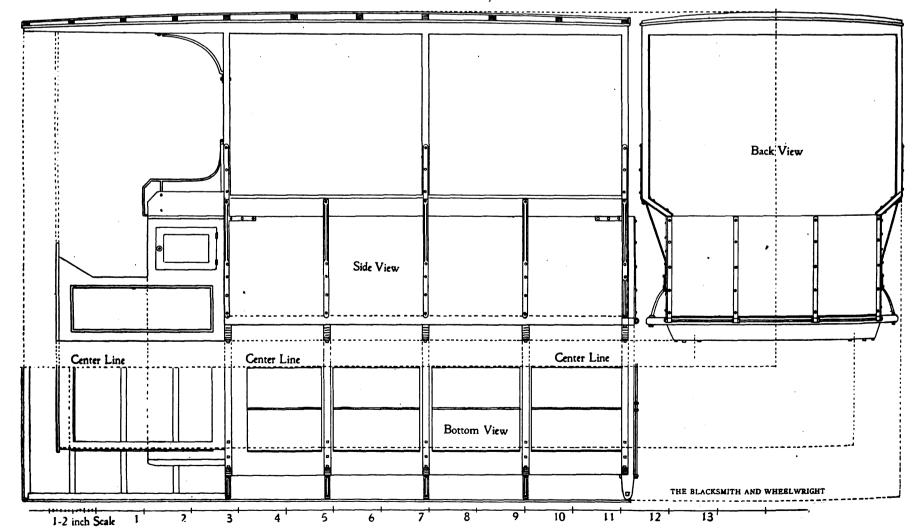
This has wing boards, being narrowed across the sills and wide above the wing boards and top rails. The base of the body has sills and a side board cap over it.
